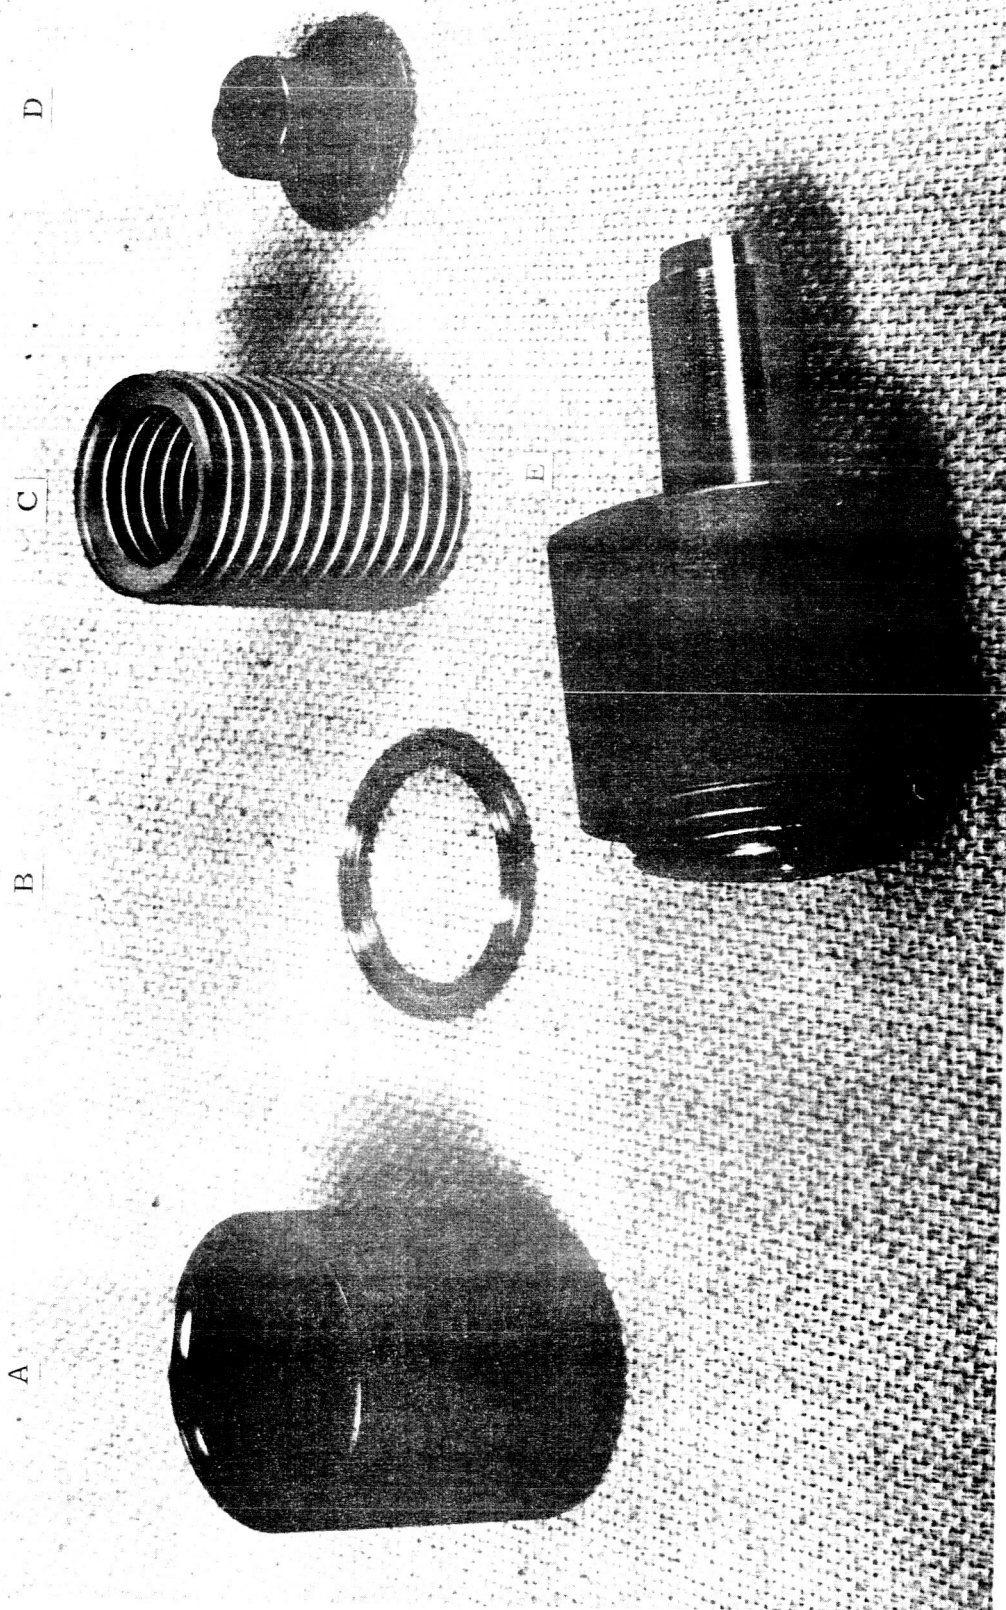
MOVABLE ELECTRODE PARTS AND WELDED ASSEMBLY
